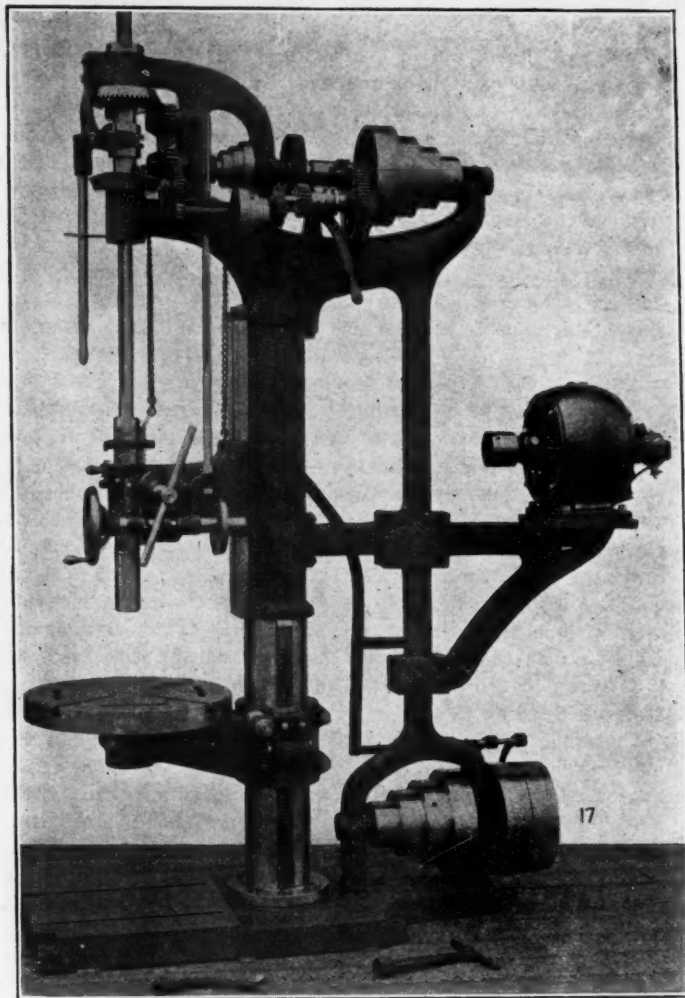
STANDARD DRILL PRESS ARRANGED FOR MOTOR DRIVE. CINCINNATI MACHINE TOOL CO.
